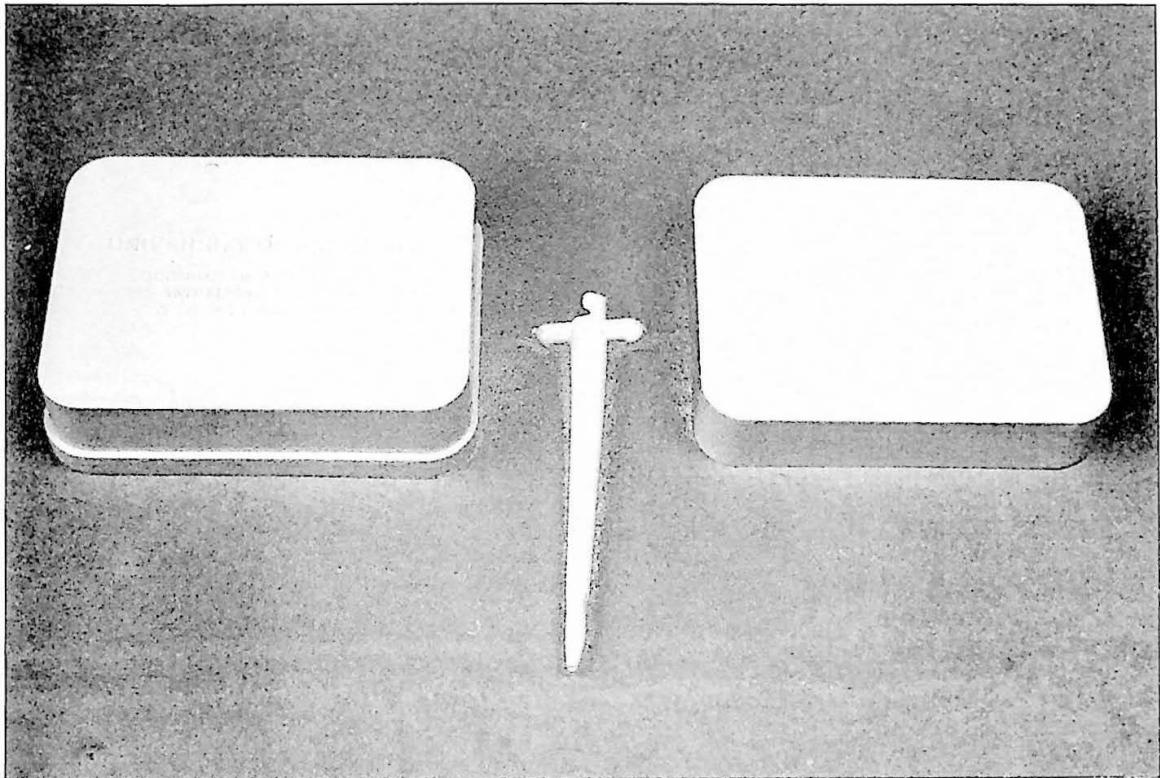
a Example of injection moulded container component (external view) and sprue
